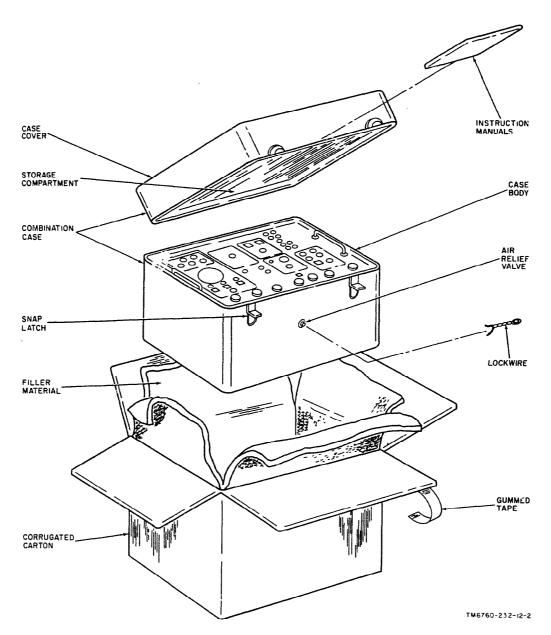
Typical packaging of test panel or blower assembly of bench test set.
